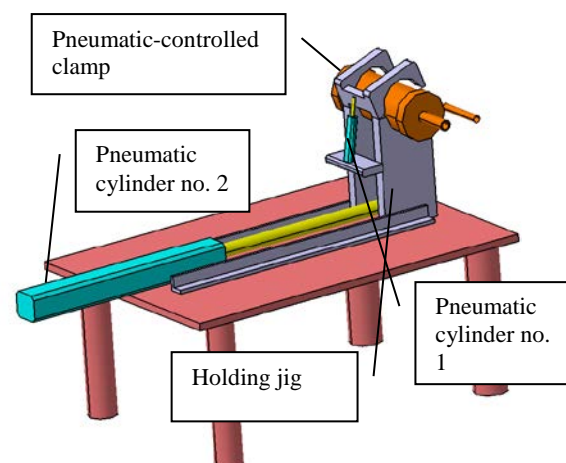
Jig designed to hold the tank firmly at the centre of the robot welding workstation.
